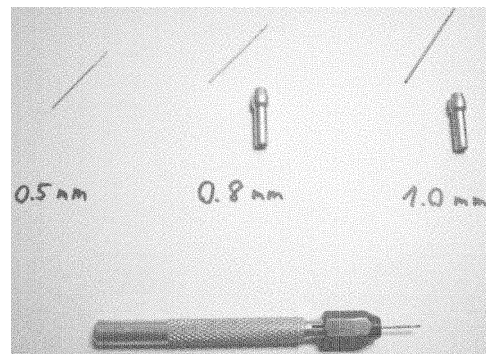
Drilling tools: three size of drill bits, collets for two of them, and a manual drill.
